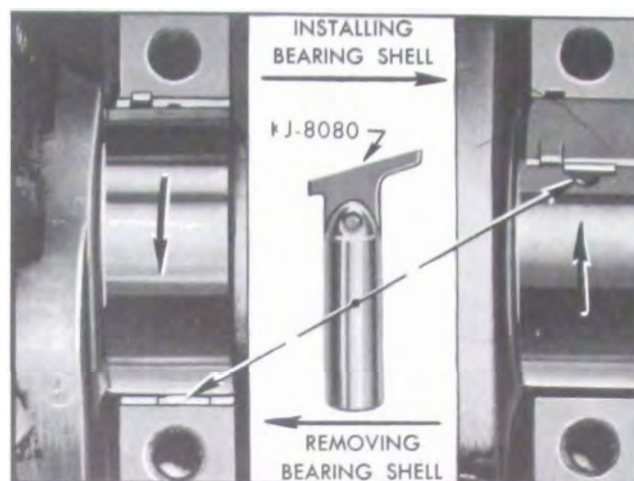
Removing and Installing Crankshaft Bearing Upper Shell
